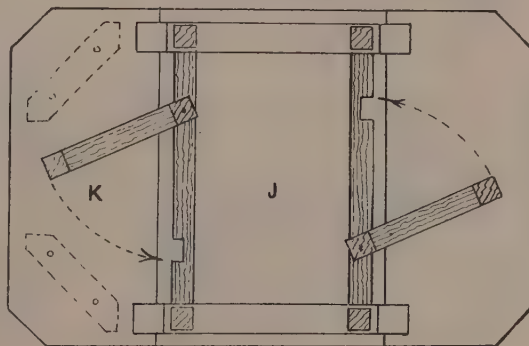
PLAN, SHOWING LEG ARRANGEMENT.
